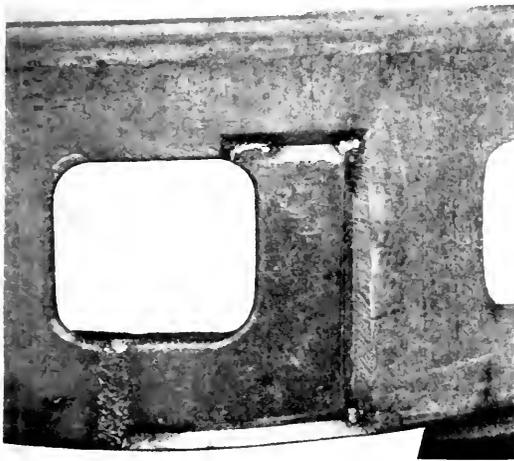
Welding a Steel Patch to Repair a Cast Iron Break
